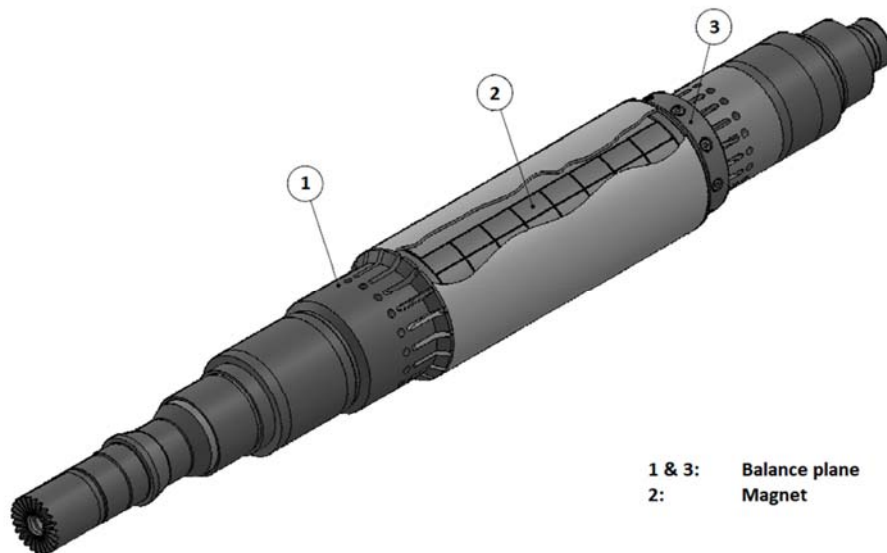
Rotor model showing balancing planes (1&3) and the magnets (2)
